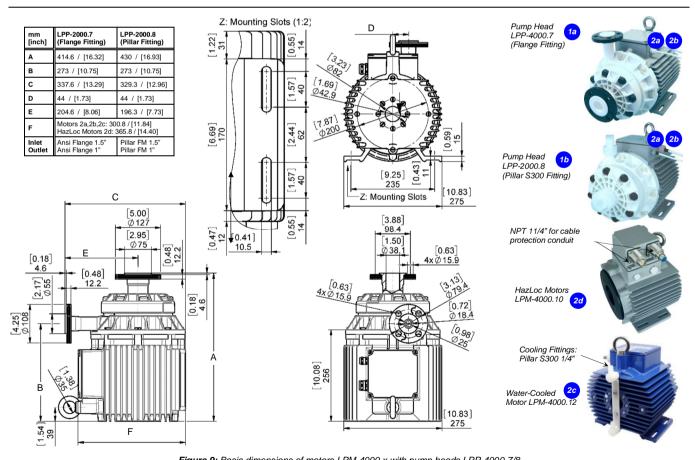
Basic dimensions of motors LPM-4000.x with pump heads LPP-4000.7/8 Note 1: Detailed Drawing with pump head LPP-4000.8 (Pillar fitting), hazardous location motors or motors with integrated water-cooling are available on request. Note 2: Non-tolerated dimensions are for reference only.
